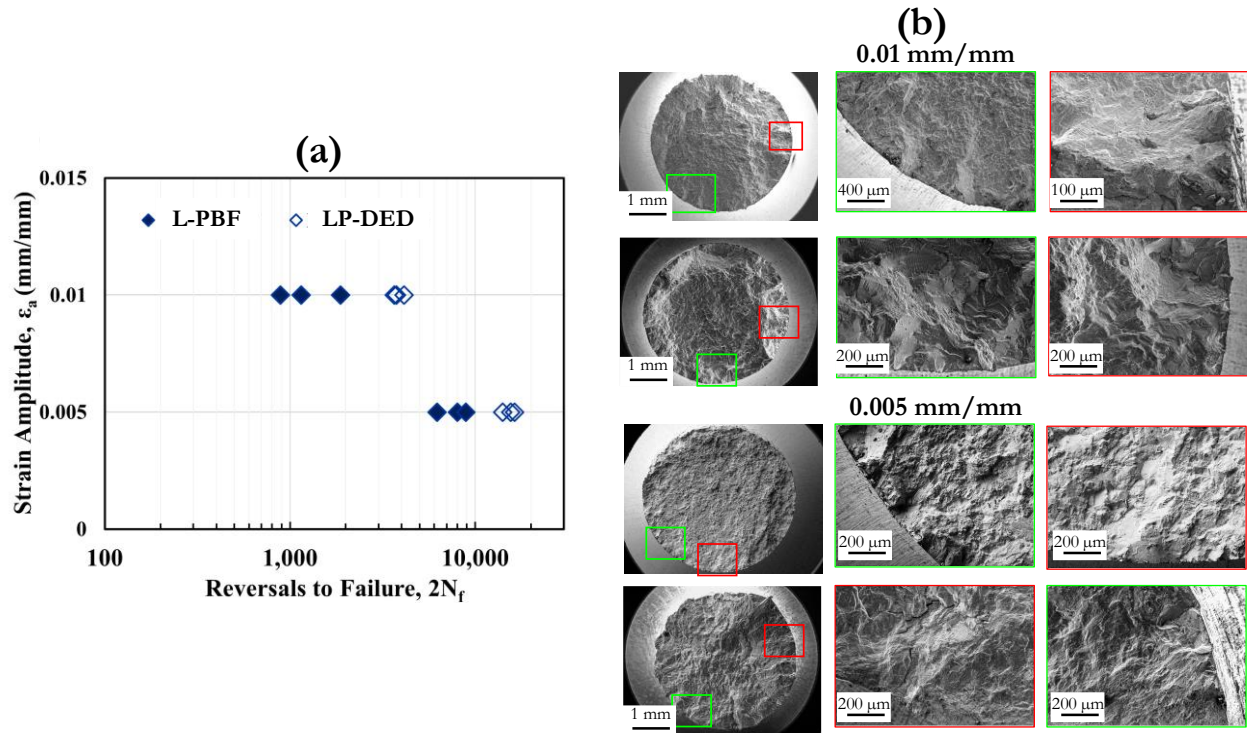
(a) Strain-life plot of L-PBF and LP-DED Monel K500 and (b) fatigue fracture surfaces.
